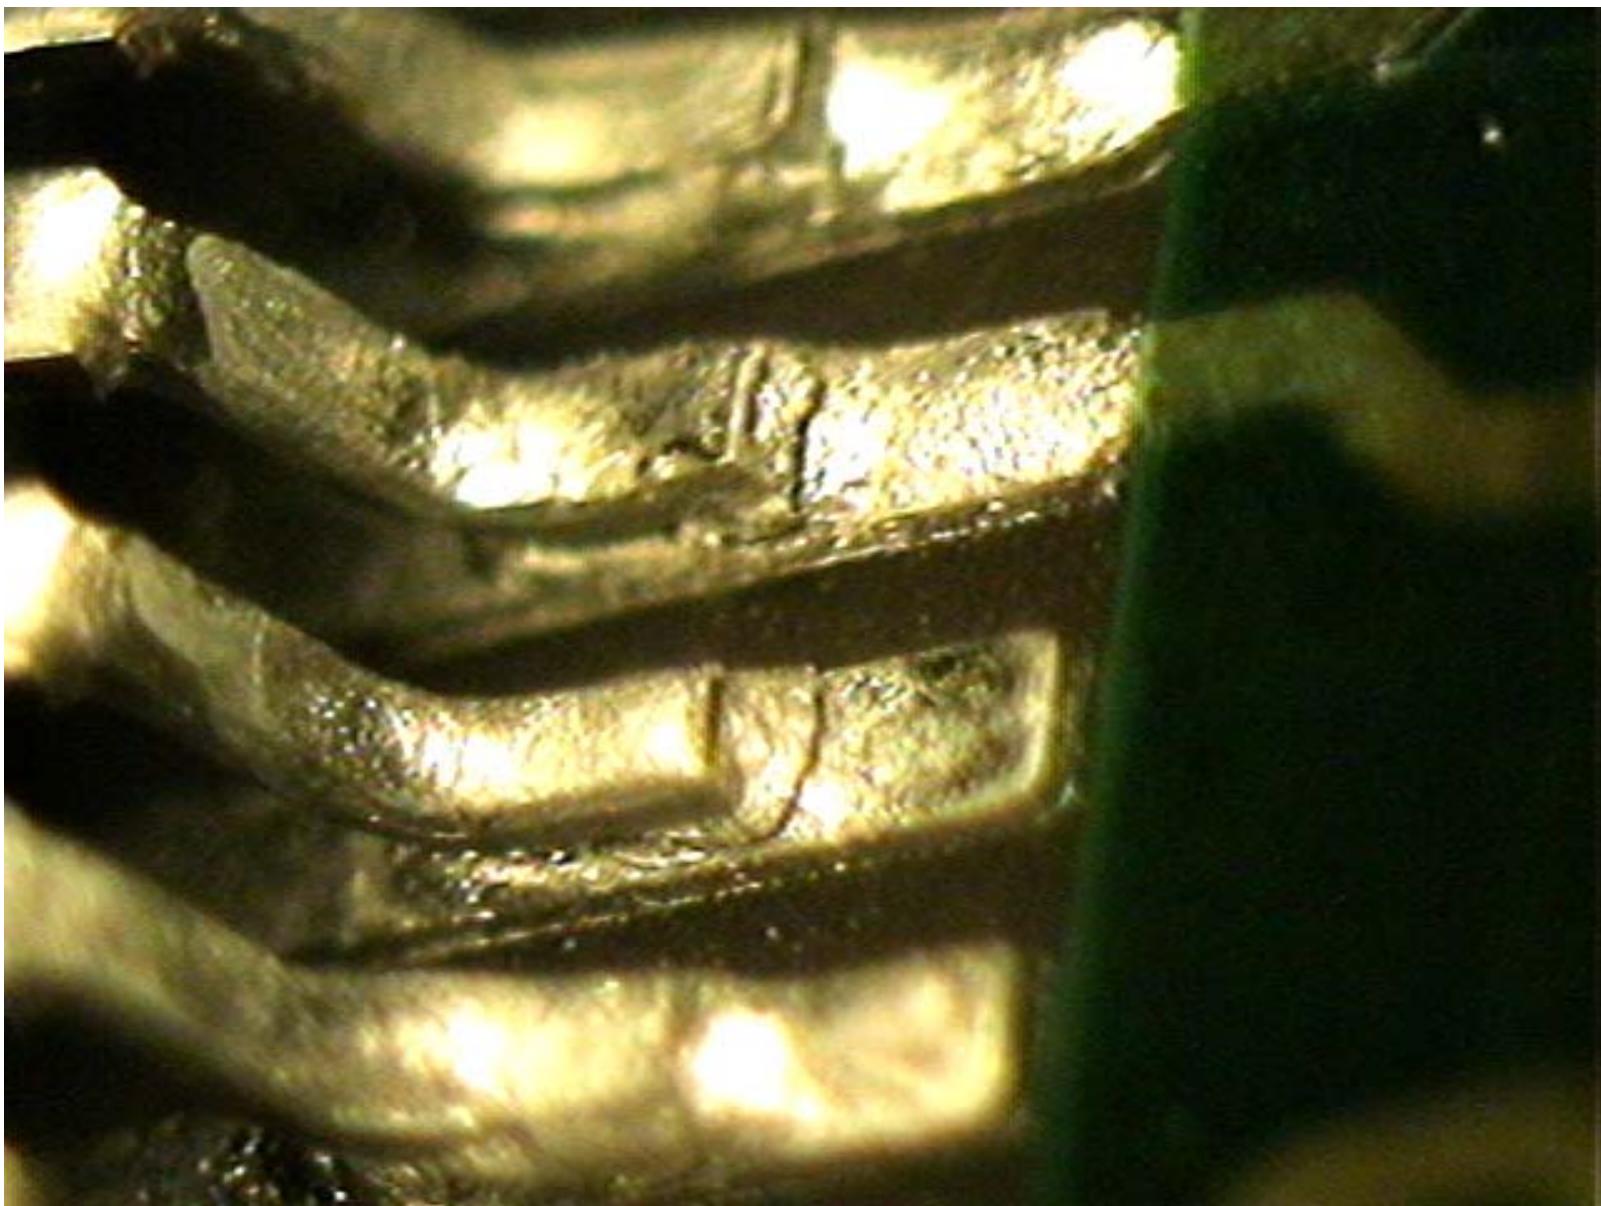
Vehicle ID 188, Reworked TQFP-208 U3, SACB Solder/NiPdAu Component Finish, 150x
